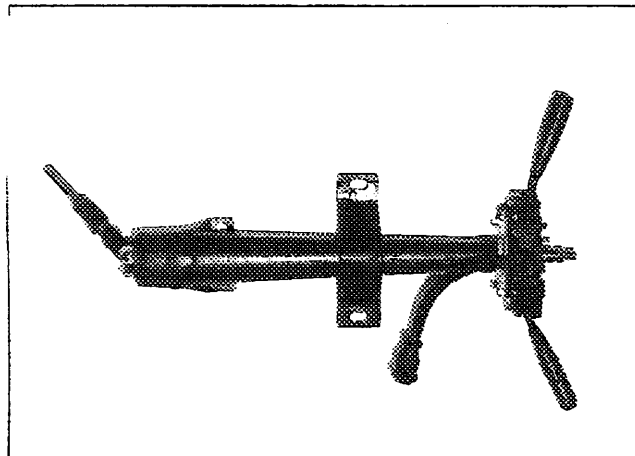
REINFORCED STEERING COLUMN TYPE B
